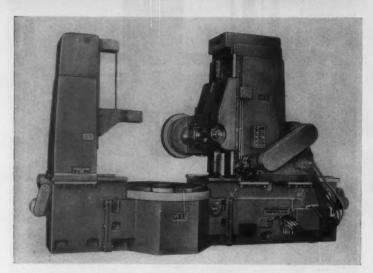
Gould & Eberhardt disc type gear-cutting machine for spur gears
